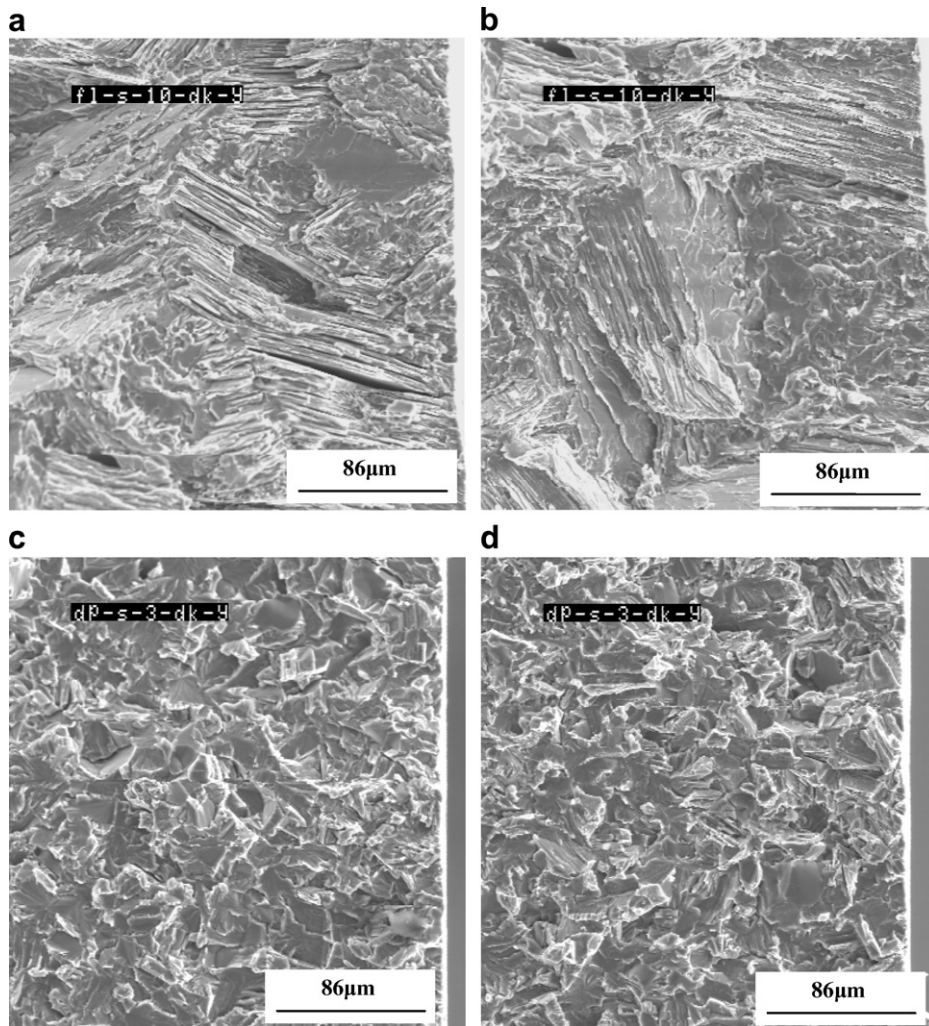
Fracture surfaces of specimen (a and b) fl-s-10, (c and d) specimen dp-s-3.
